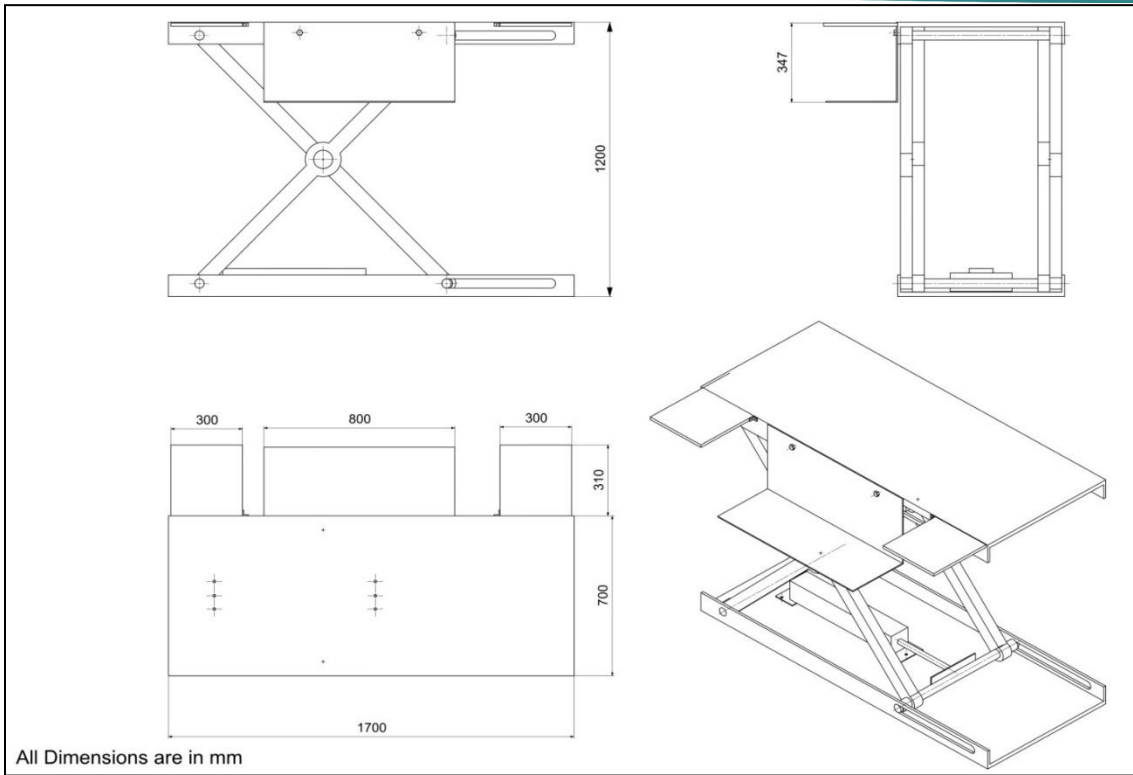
Drawing of working Table (with Top view, Front view, Side view and Isometric view).
